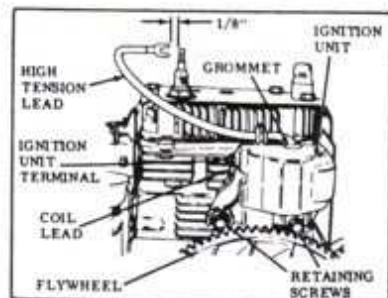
View of solid state ignition unit used on some models equipped with flywheel alternator. System should produce a good blue spark 1/8-inch (3 mm) long at cranking speed.
